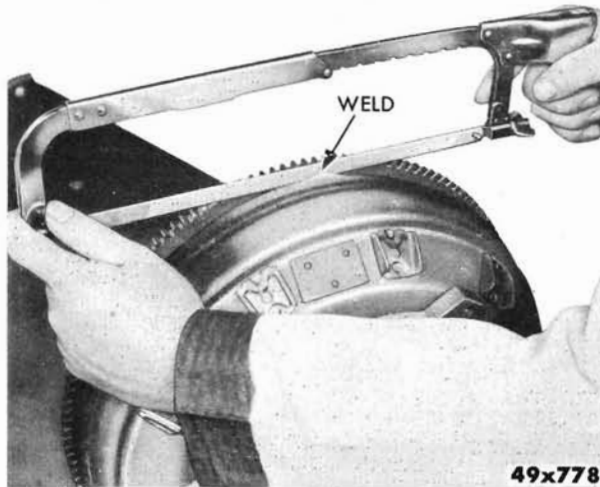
Cutting Ring Gear to Housing Weld Spots
